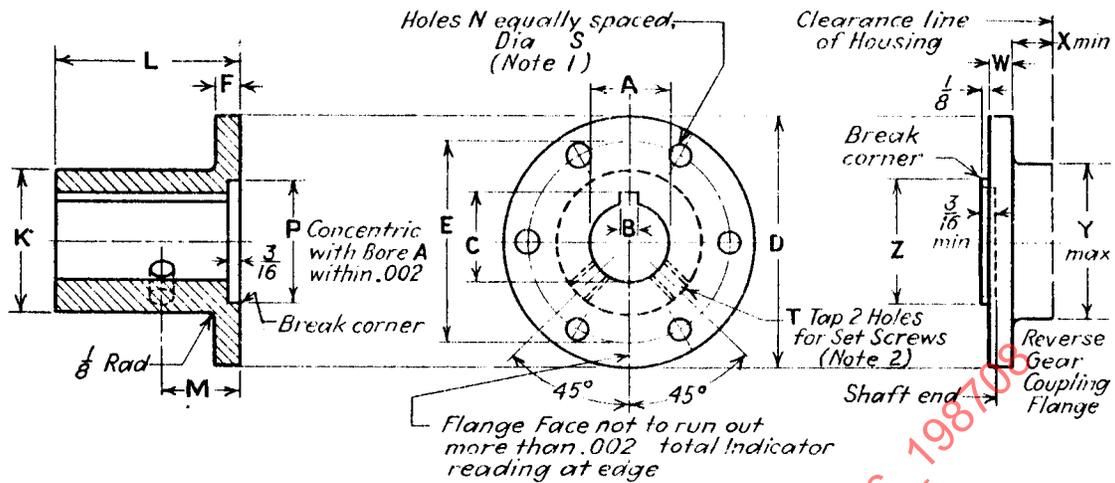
TYPE I PROPELLER-SHAFT COUPLING, INTERNAL PILOT, STRAIGHT BORE, SAE FLANGE NO. 1S 2S, 3S, AND 4S
